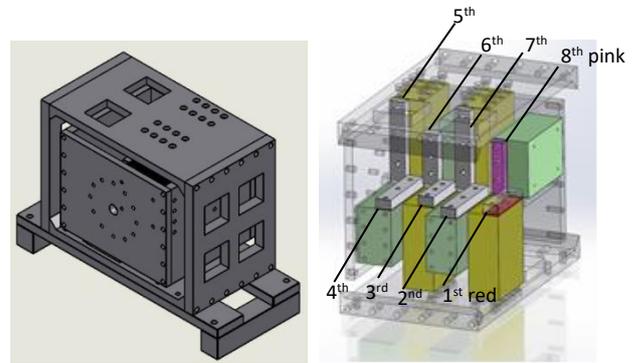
Schematic diagram of flexure bearing with eight elastic hinges (four pieces, highlighted in red, and four pieces highlighted in pink).
